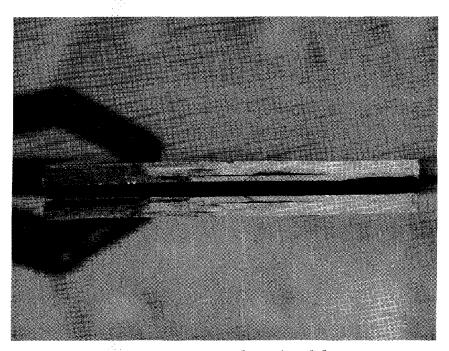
Fracture Surface of Specimen No. 353492-1A
